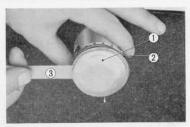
Measuring the piston ring side clearance ① Piston
